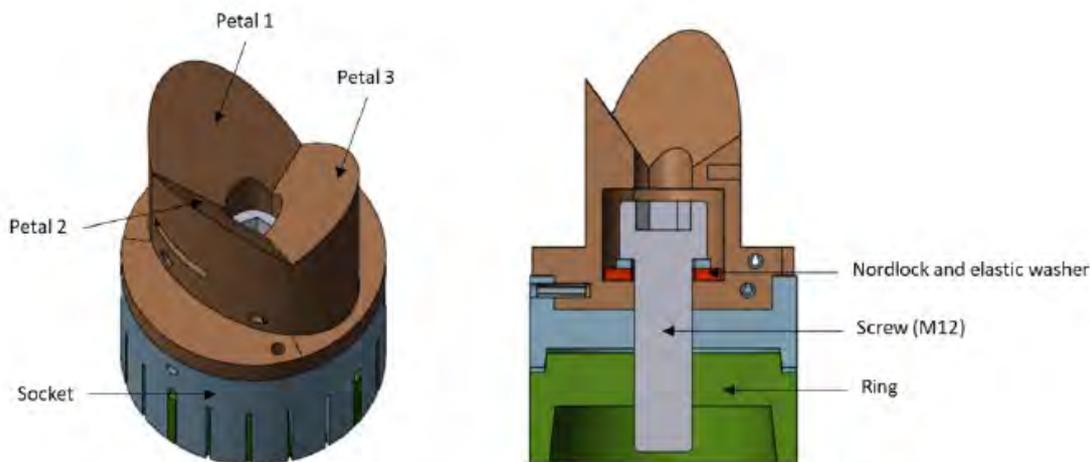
Corner Cube Retroreflector (CCR) assembly (rough dimensions 90mm length and radius 27.25 mm)
